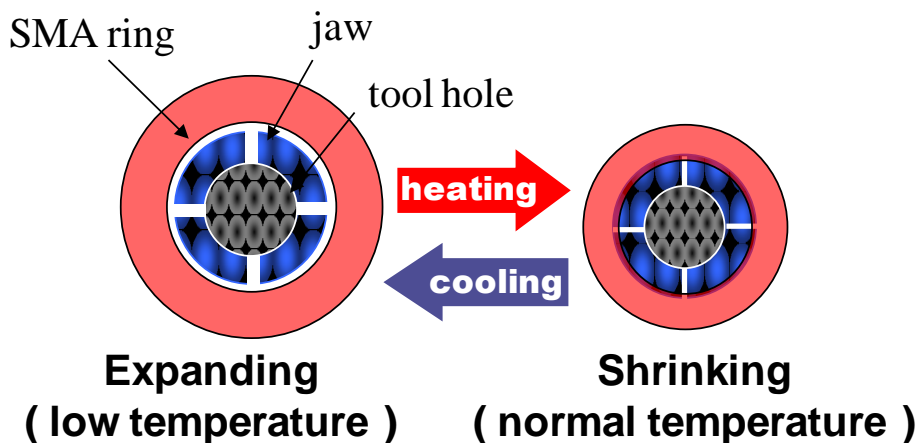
The schematic diagram of clamping and unclamping of tool holder
